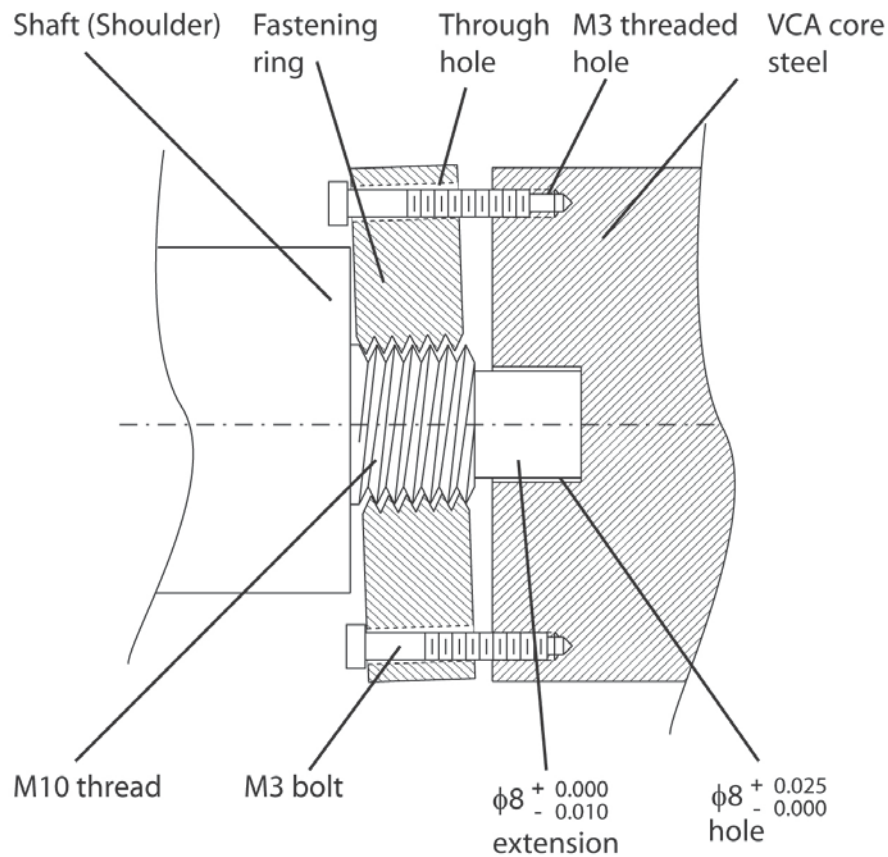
VCA alignment to the shaft. Dimensions in [mm].
